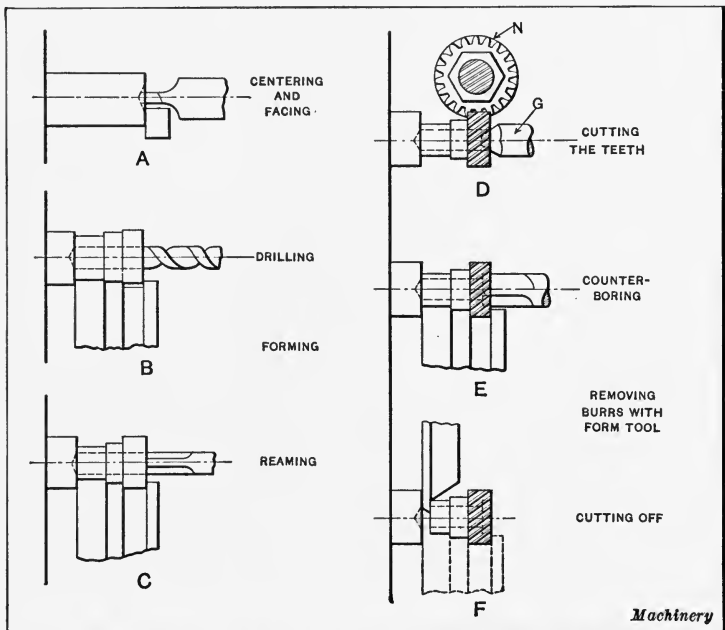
Successive Operations on Helical or Spiral Gears produced in Automatic Screw Machine
